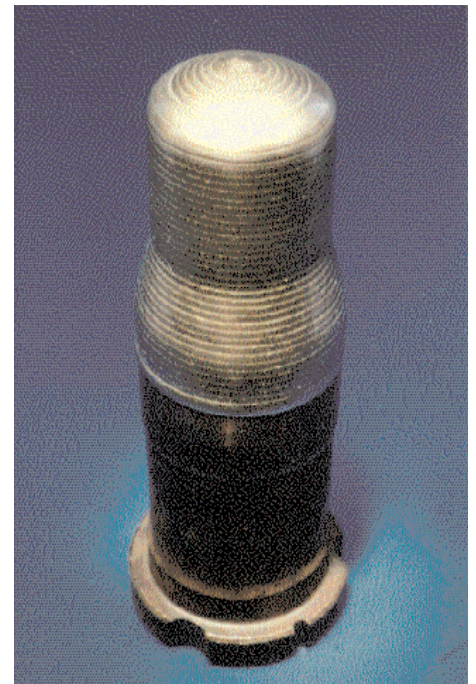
Hot forming tool for forging car axle parts, tear area is coated with Stellite 21
